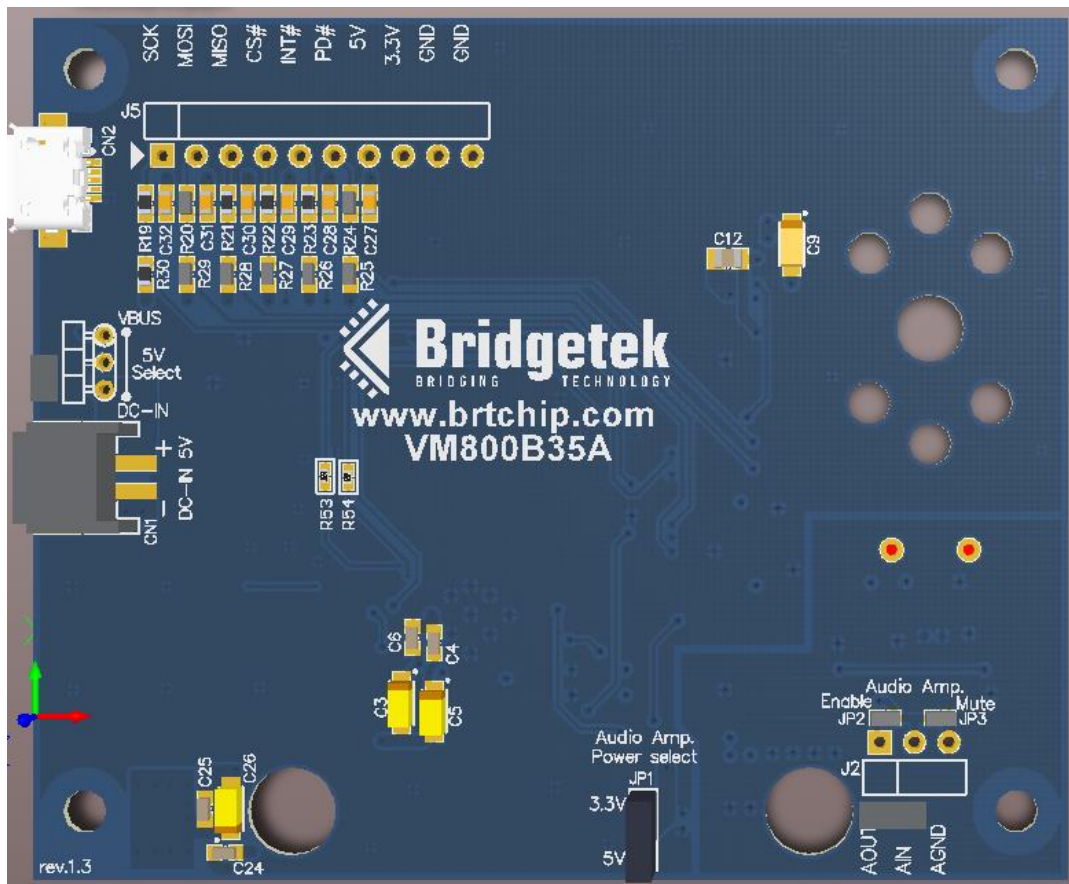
VM800B Module PCB View, 3.5-inch Display Version
